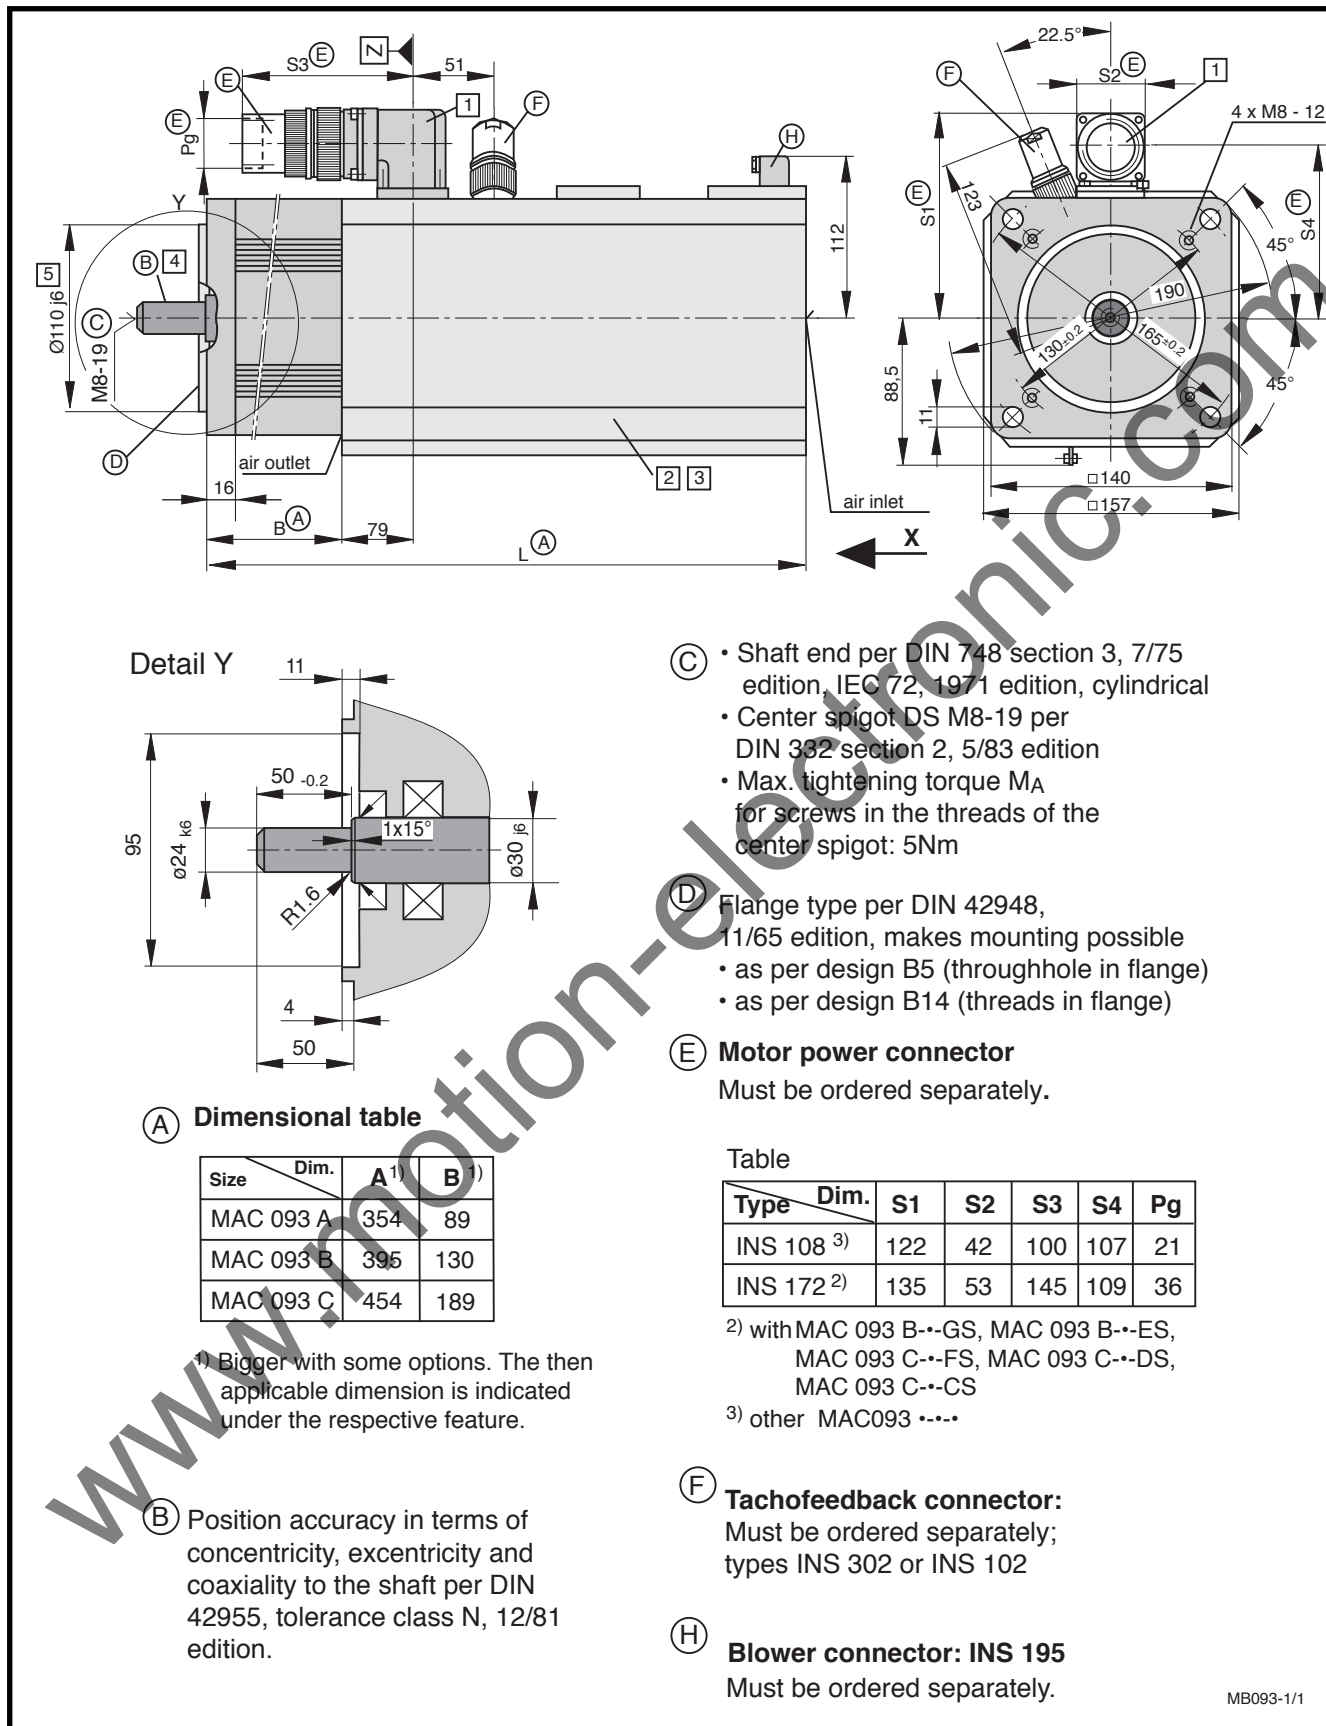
Dimensional data - MAC 093 (axial cooling)
